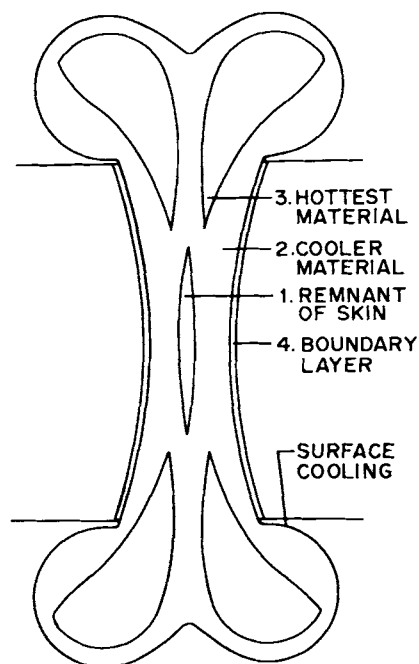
Schematic picture to show five zones in the weld joint of polyethylene (from Atkinson et al.¹⁻³).
